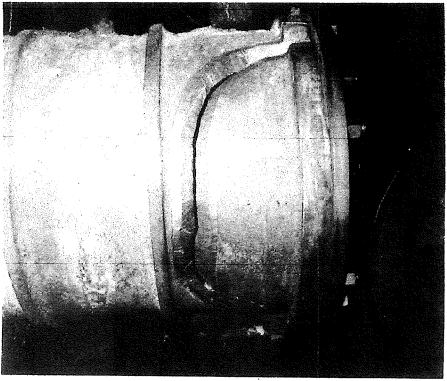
The cylinder from locomotive 5456 being repaired by oxy-acetylene welding. Note the flame-cut steel disk being used as a dummy cylinder cover to keep the broken segment in place during the repair process.
